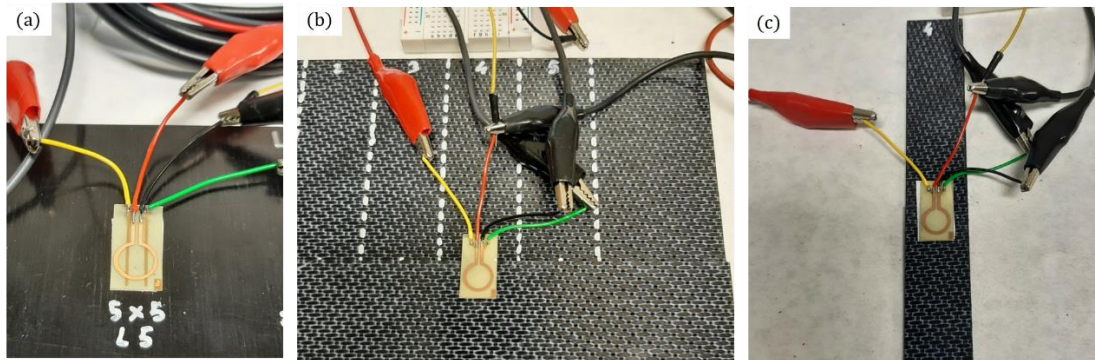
EM sensor placement on (a) defective CFRP laminate with embedded artificial defects and placement on thermoplastic welded joint (b) before and (c) after machining operation.
